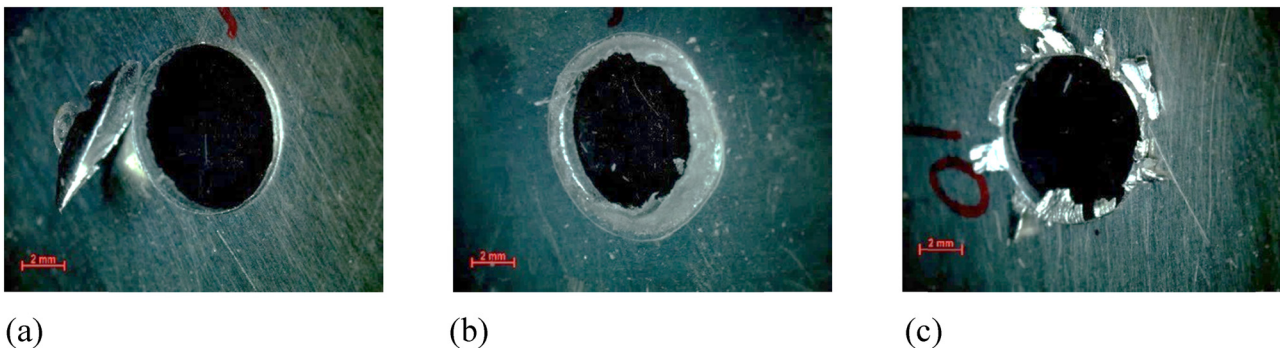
Burr types: (a) uniform (with drill cap), (b) uniform, and (c) crown.
